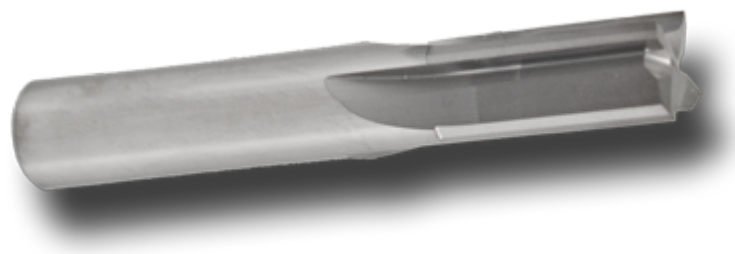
Typical straight end mill tool (Source: [HTC 17])
